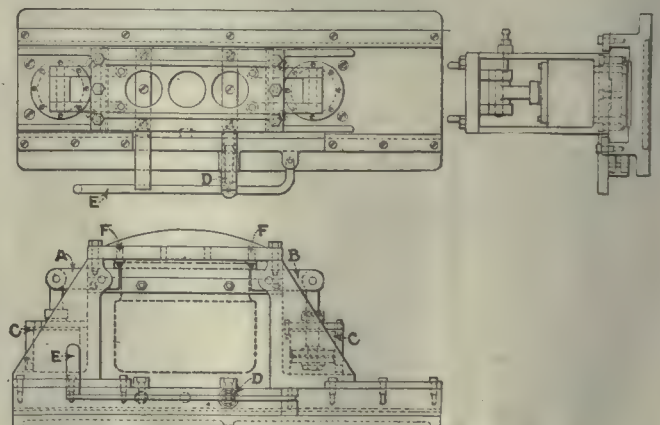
DETAILS OF PNEUMATIC FIXTURE
